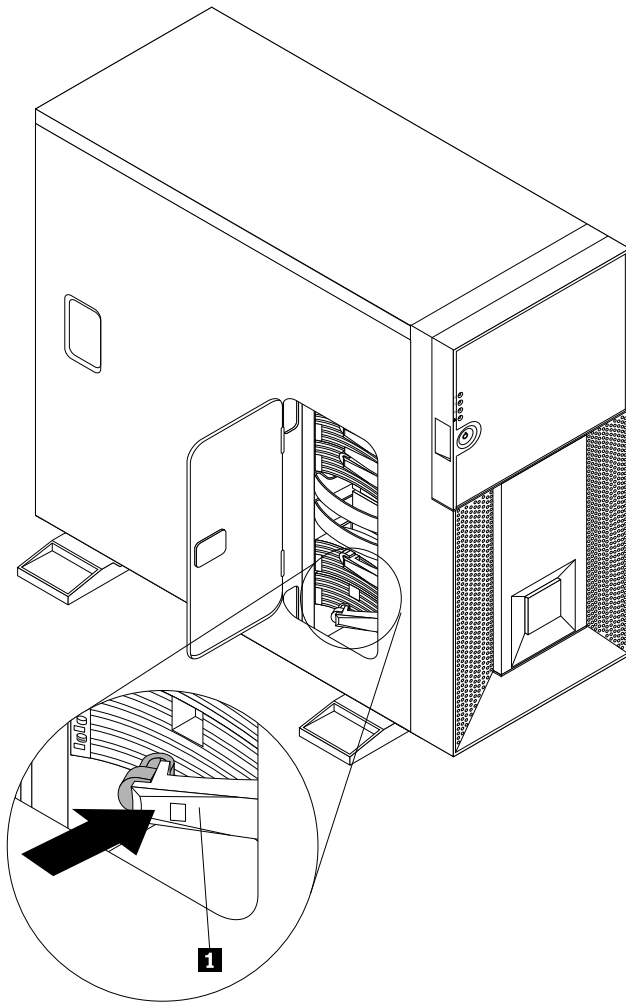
Locking the hot-swap hard disk drive in the drive bay
